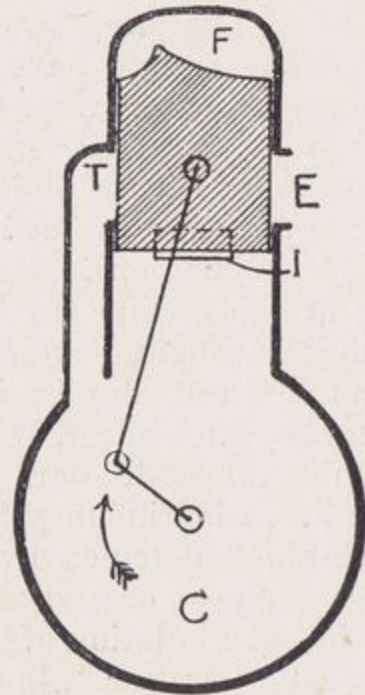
Showing the Piston ascending and about to uncover the inlet port I. to allow gas mixture to enter the crank chamber.
